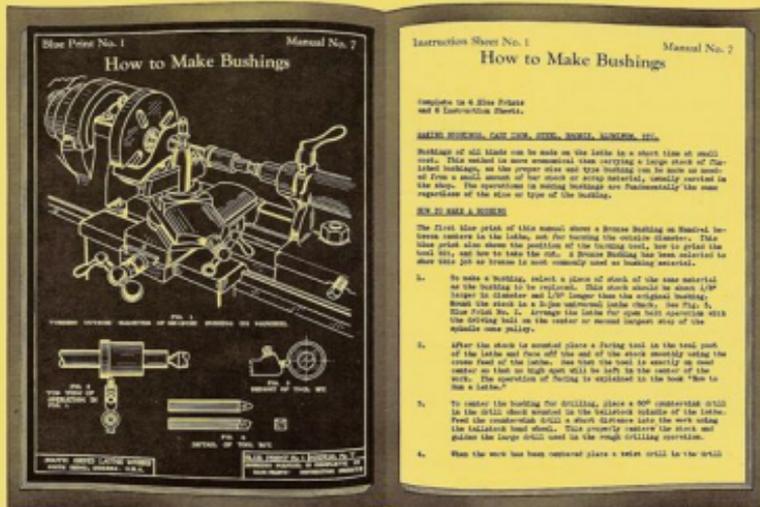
The Illustration Shows Manual No. 7, "How to Make Bushings," This Manual Contains 4 Blue Prints, 8 1/2" x 11", and 6 Instruction Sheets, 8 1/2" x 11".
